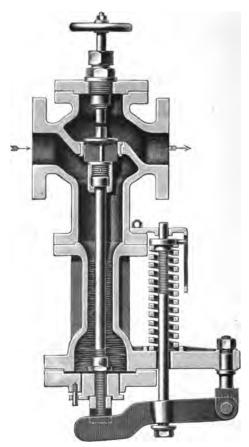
Schäffer and Budenberg's reducing valve (Auld type).
